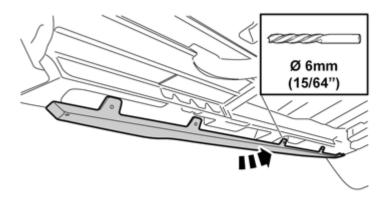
Drilling Out Hole Courtesy of VOLVO CARS CORPORATION
